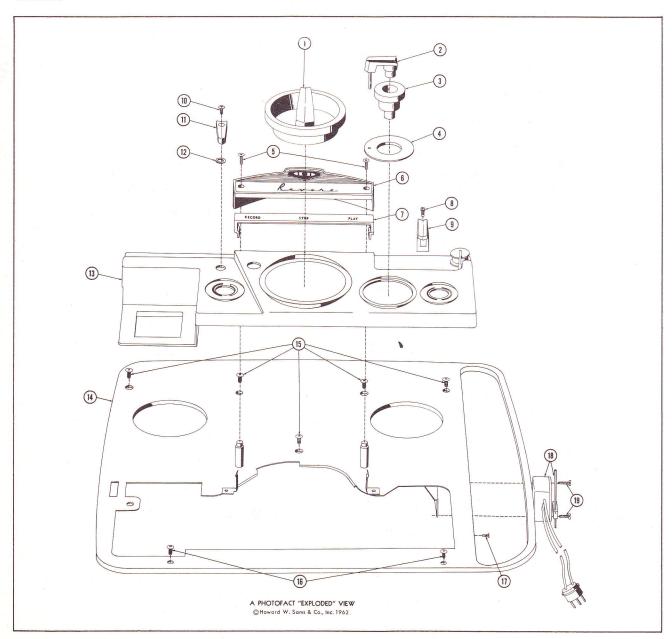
Exploded View of Plastic Top and Top Plate Assembly
